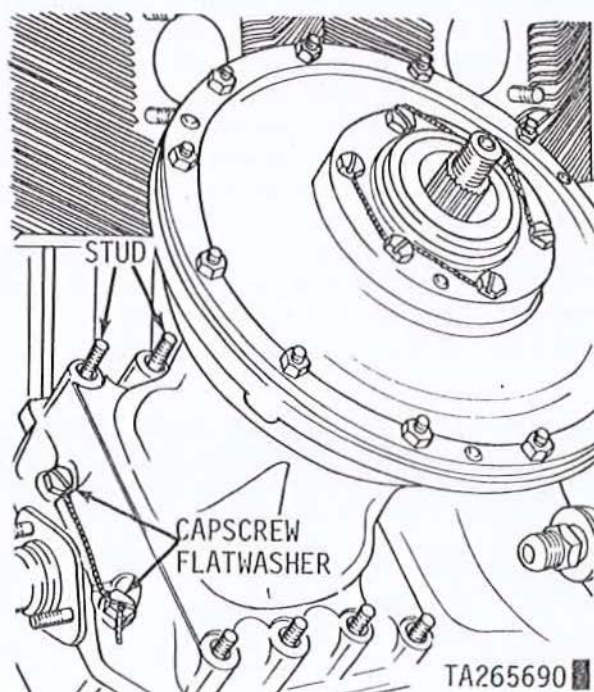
Removing or installing front fan drive housing attaching parts — rear view.
